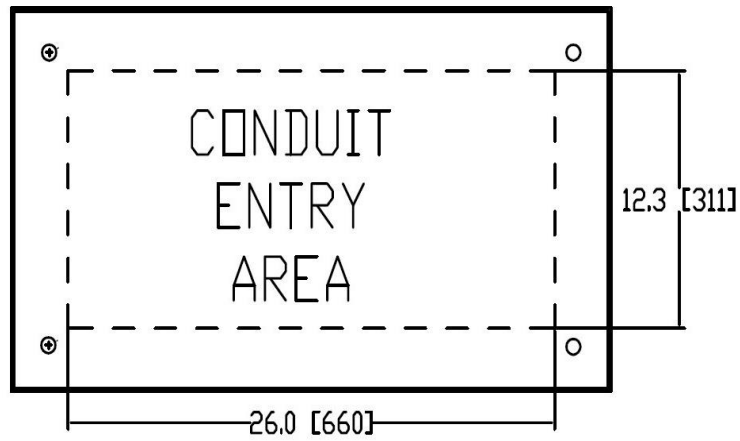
Top Dimensions, Customer I/O Panel (Enclosed)
